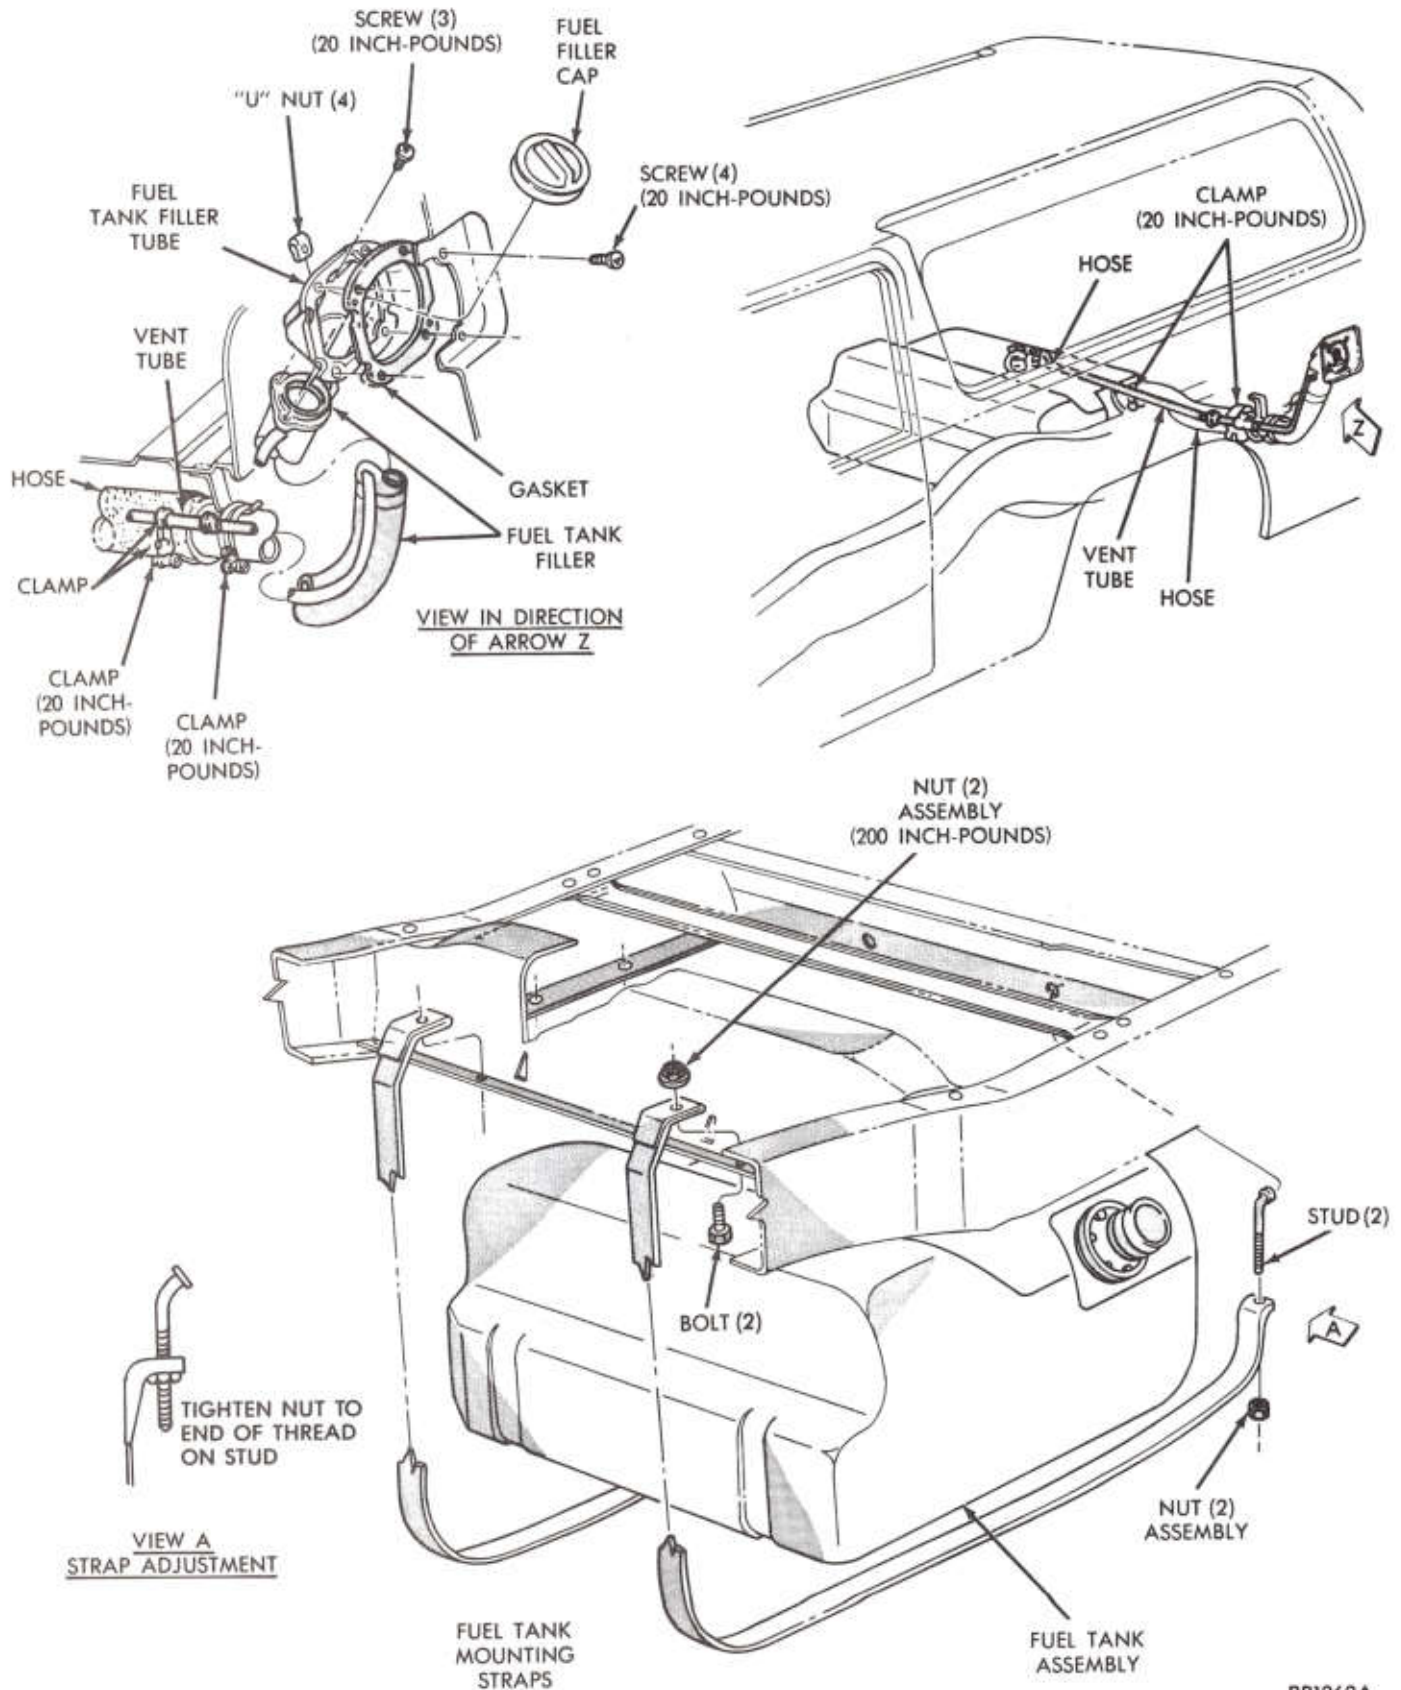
Fuel Tank Filler Tube, Ramcharger Models
